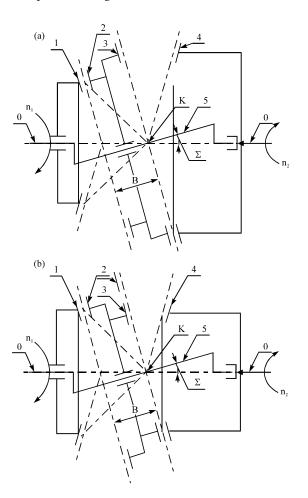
Coaxial gearbox scheme, gear coupling module is: a) lager or b) smaller than bevel precessional gear
